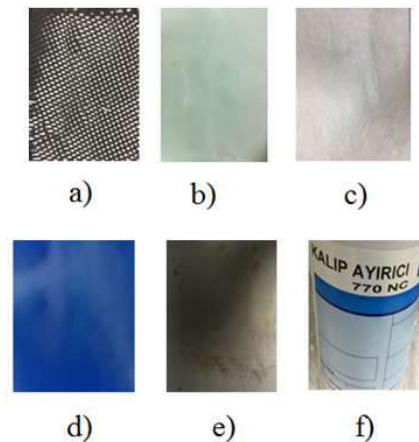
Vacuum bagging materials (a-Carbon fiber, b-Separator cloth, c-Glass wool, d-Vacuum bag, e-Metal mold, f-770 NC mold separator)
